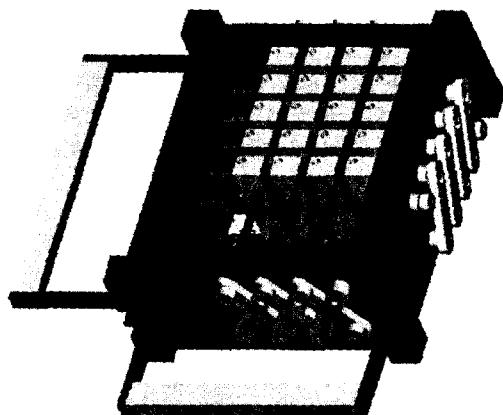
3-D modeling of pick and place system when the adjacent space of each block is wide.
